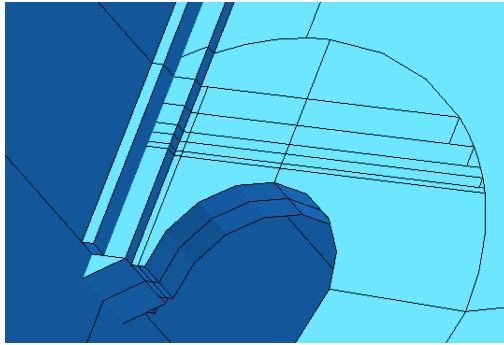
Combined weld modelling technique: increased thickness and weld tip modelled
